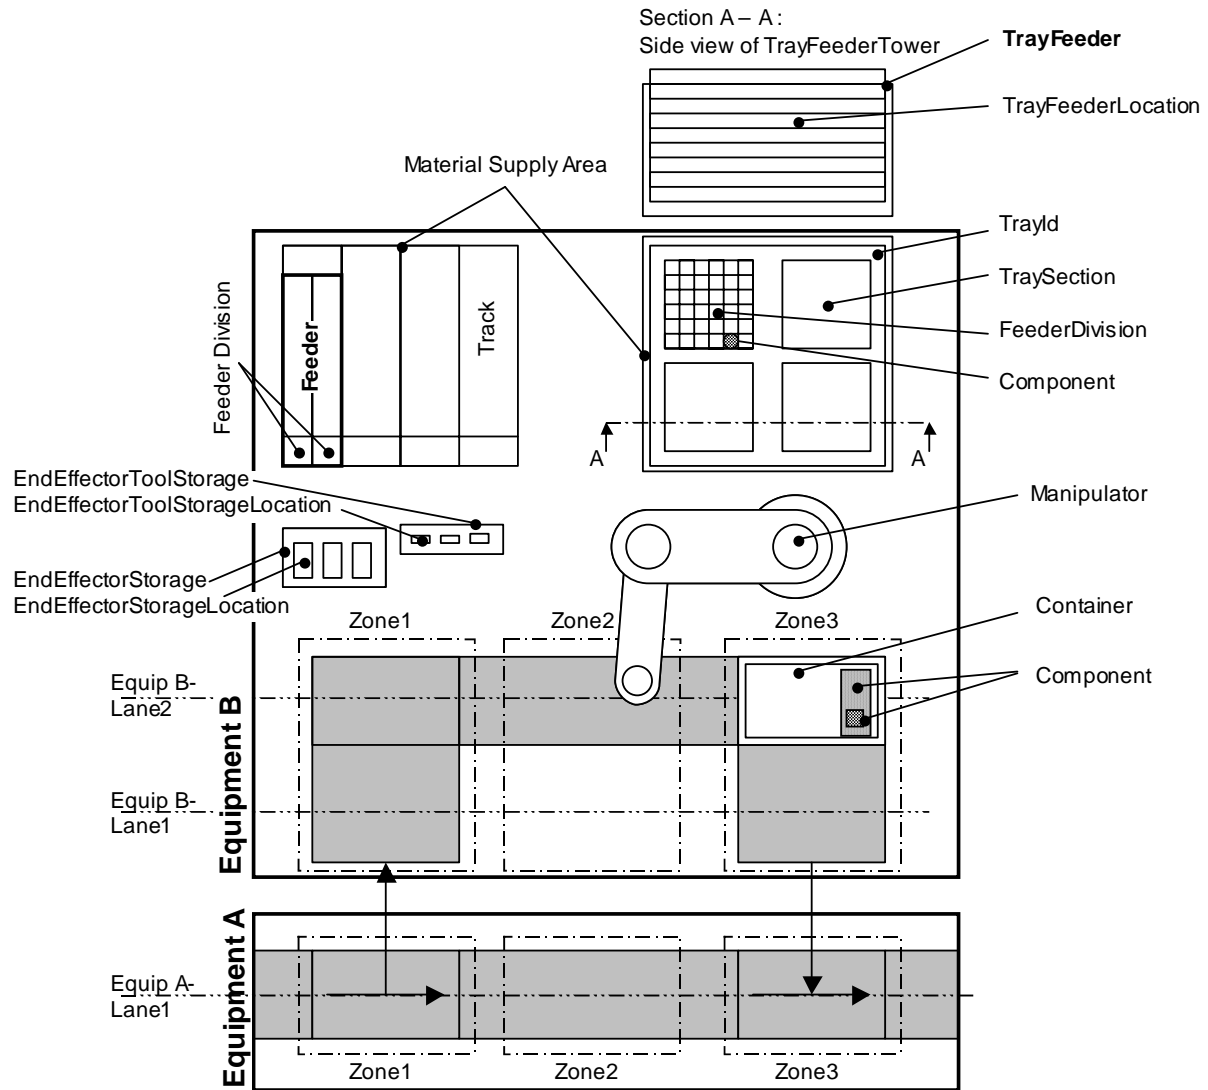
Abstract Model of Assembly Cell (=Equipment B) and Transporter module (=Equipment A)
